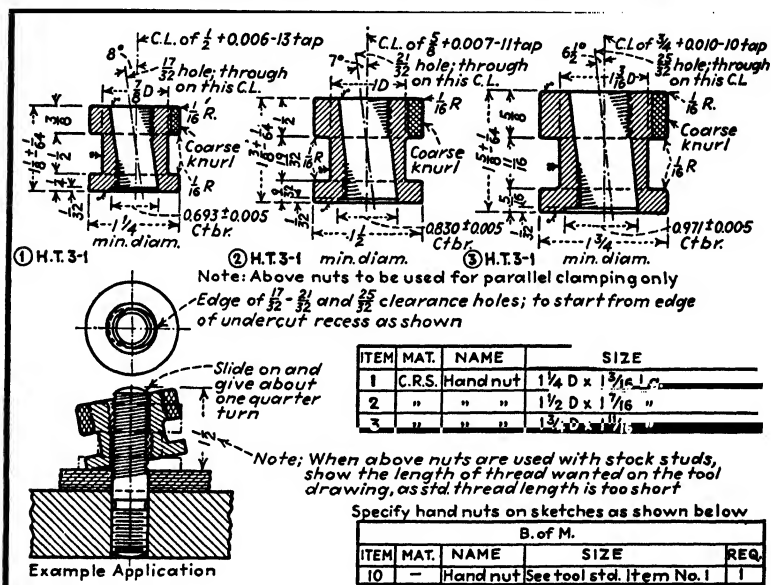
Details of a quick-acting hand nut that requires but a quarter turn to operate.
